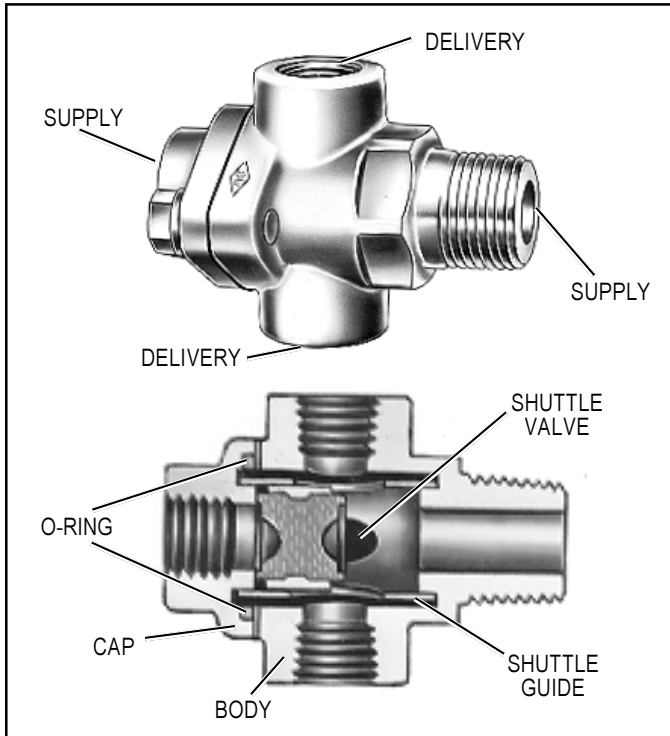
DOUBLE CHECK VALVE (SHUTTLE TYPE)
